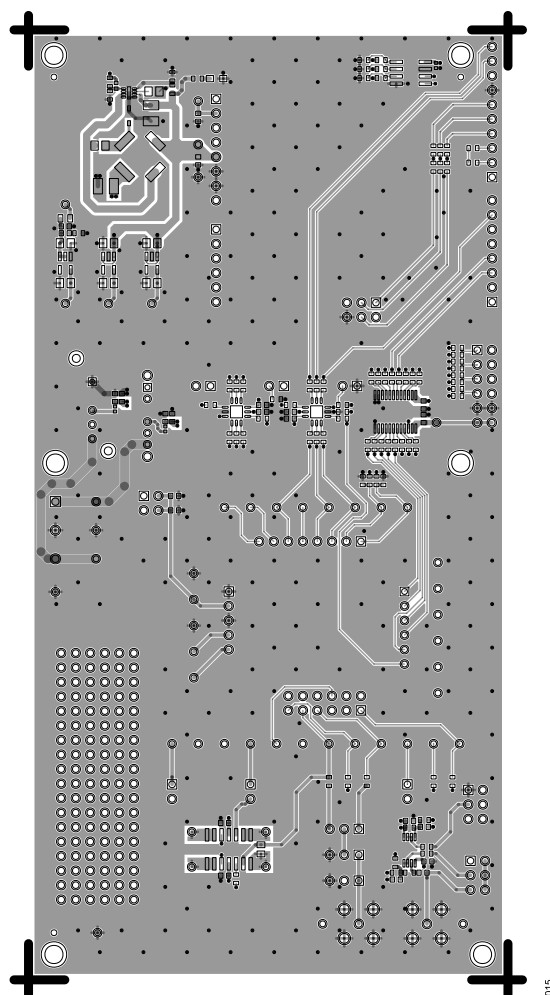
EVAL-MB-LV-ARDZ Board Layout L1 Primary
